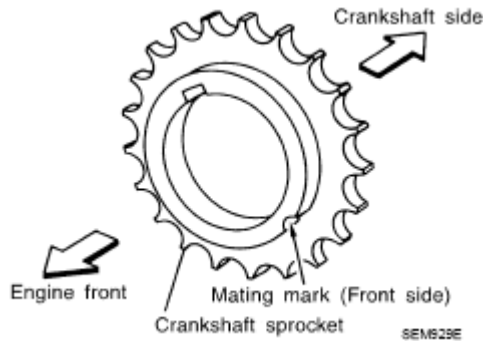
Identifying Mating Marks On Crankshaft Sprocket Face Front Of Engine
